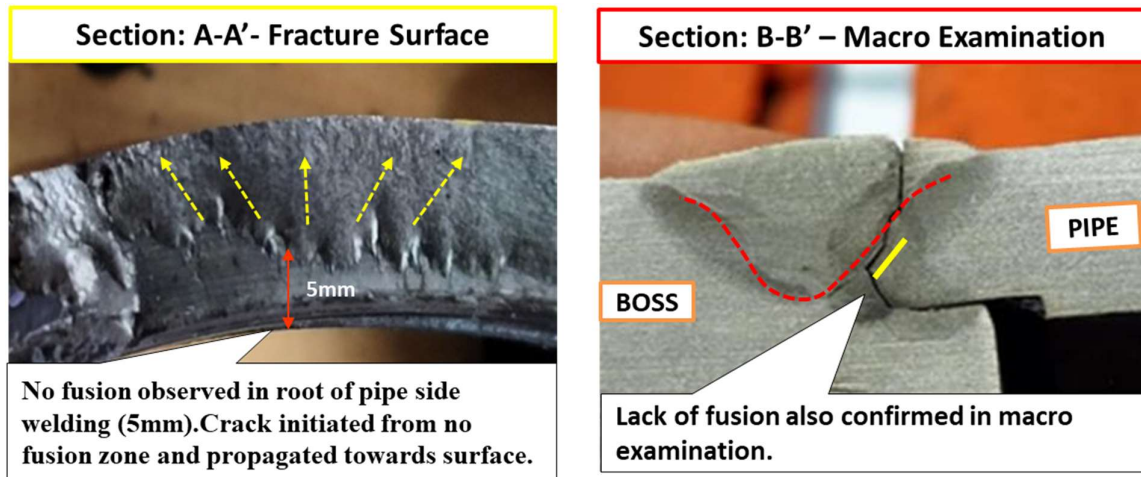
b.: details of circular weld joint crack, defect location at root of weld section
